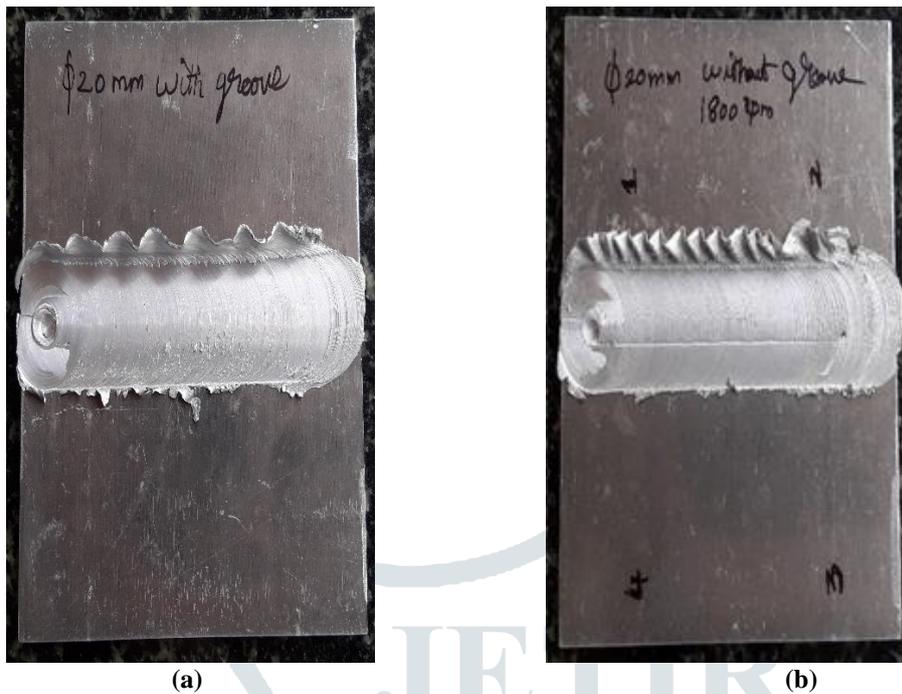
Weld Specimen of with and without groove pin tool
